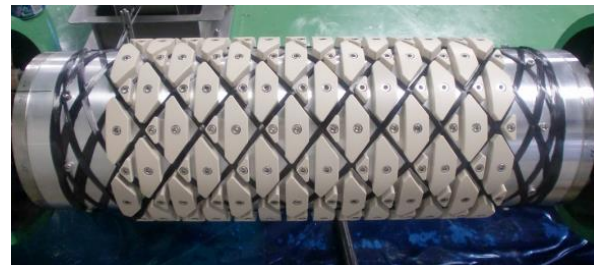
Fabrication of cylindrical CFRP grid by using a resin type mandrel.
